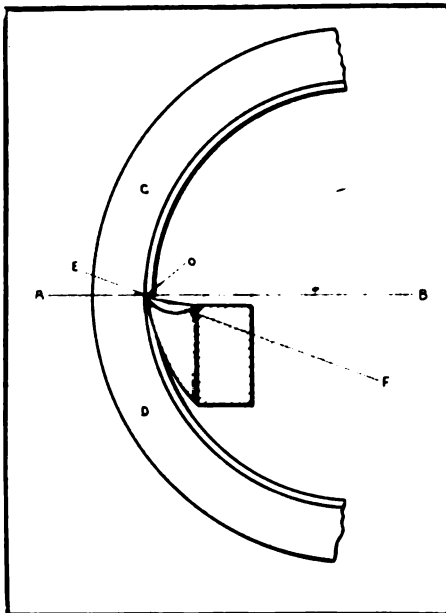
Shows Cutting Angles of a Lathe Boring Tool.
